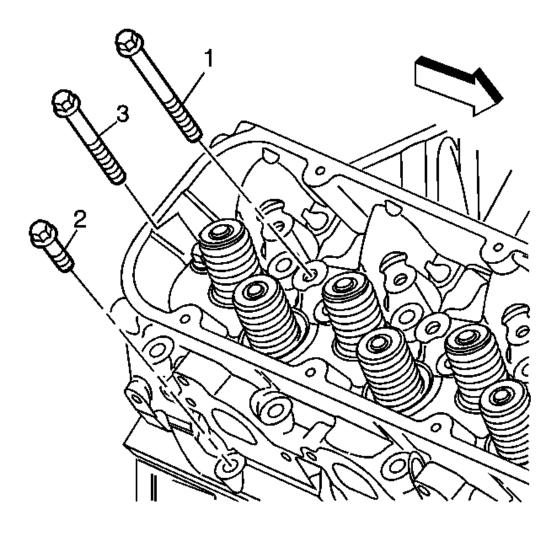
View Of Right Cylinder Head Bolts Courtesy of GENERAL MOTORS CORP.
